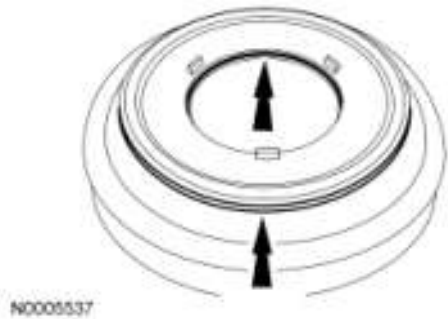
Locating Inner And Outer Piston O-Ring Seals
